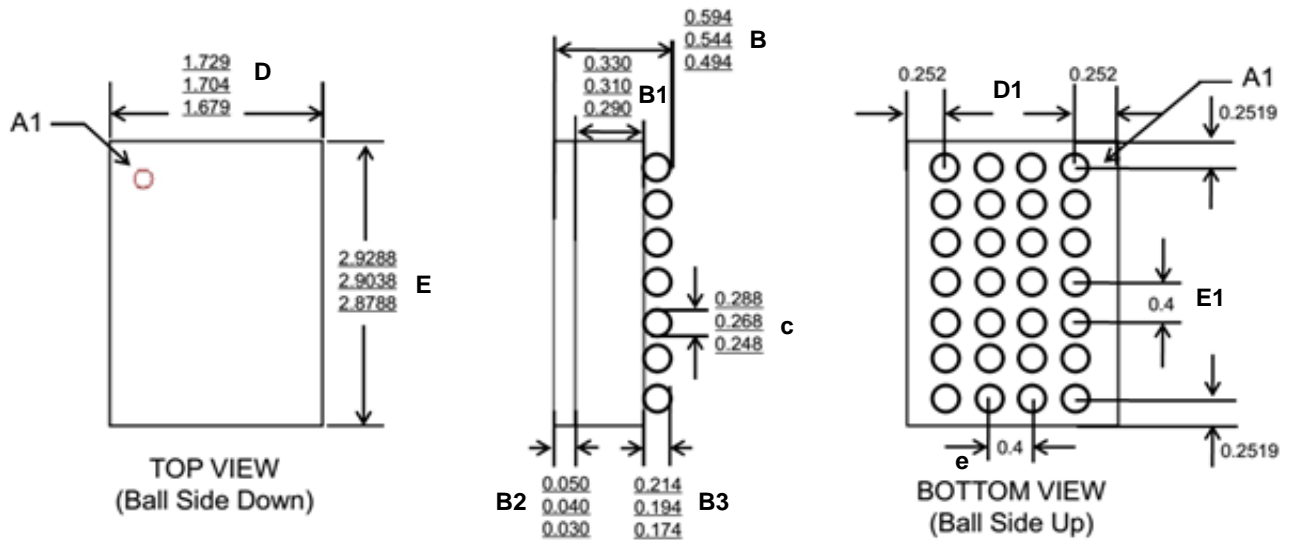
Top, Side and Bottom View of iM501 CSP Package
